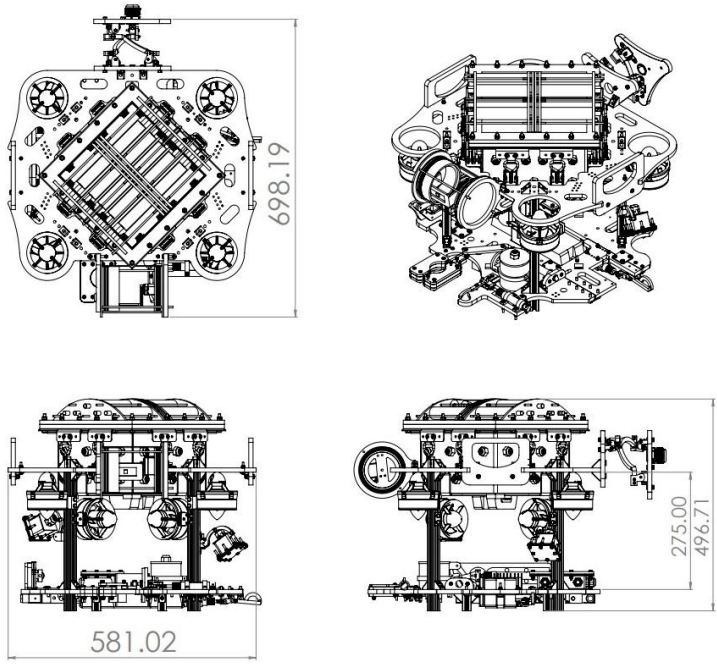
Odyssey's Detailed Drawing and Dimensions Extracted from the 3D Model
